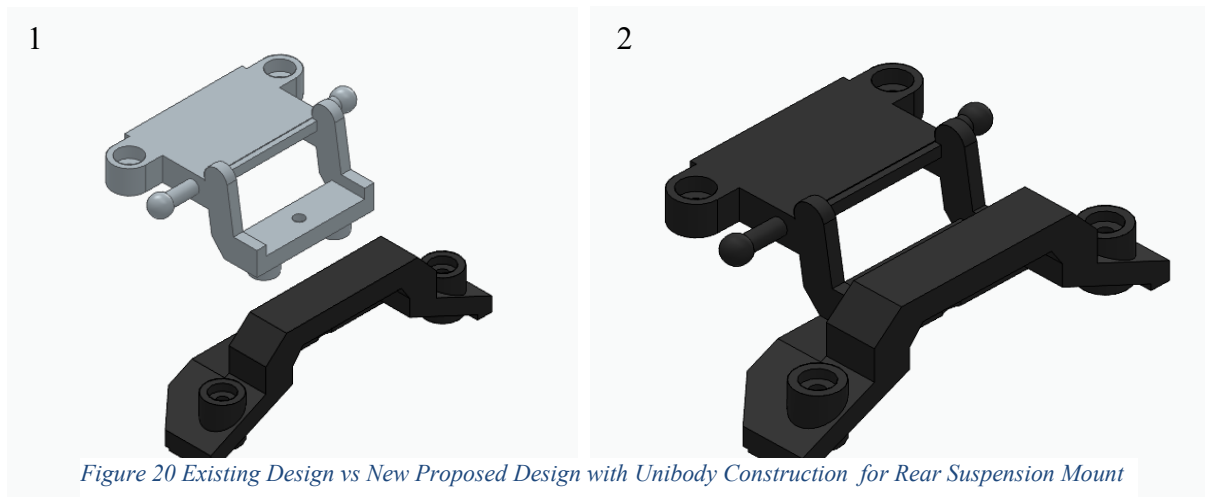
Existing Design vs New Proposed Design with Unibody Construction for Rear Suspension Mount
